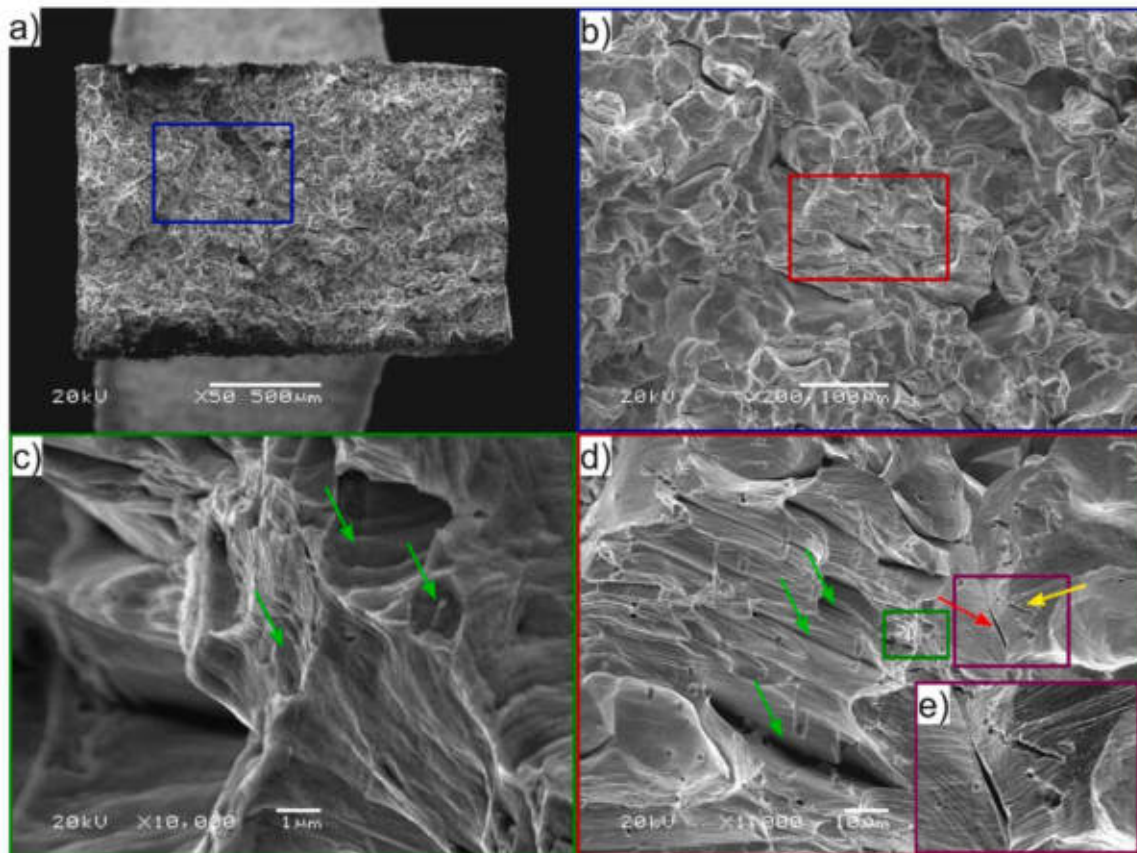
SEM pictures of the fracture surface of Specimen 2; a) and b) show intergranular decohesion; c) and d) show transgranular ductile dimple fracture; e) secondary transgranular and intergranular cracks and accompanying slip bands.
